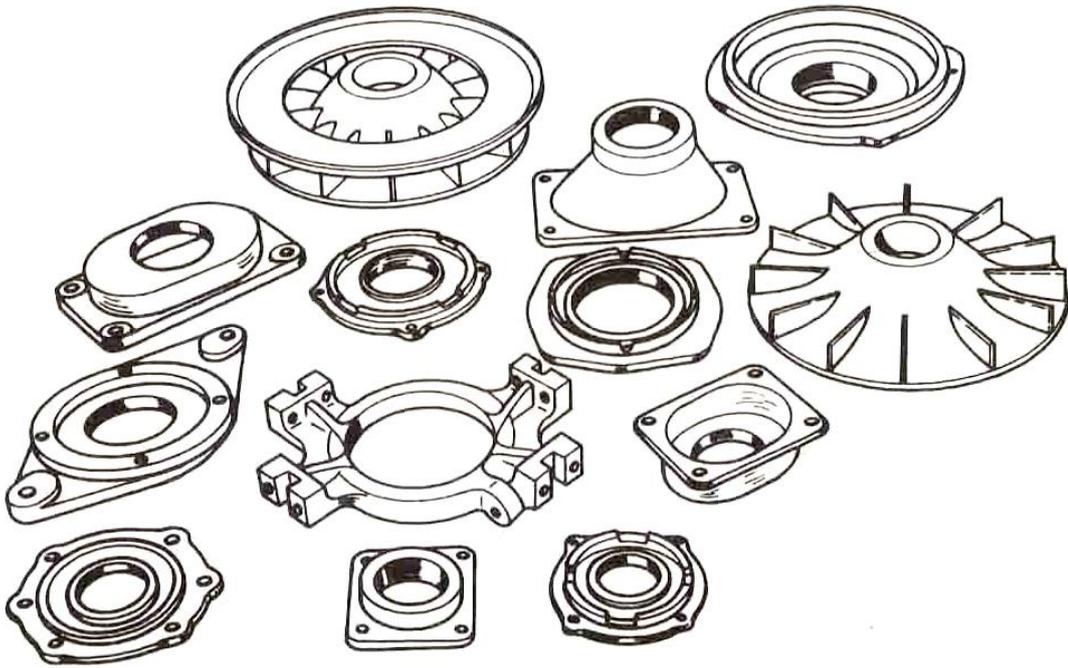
Thirteen parts with similar manufacturing process requirements but different design attributes
